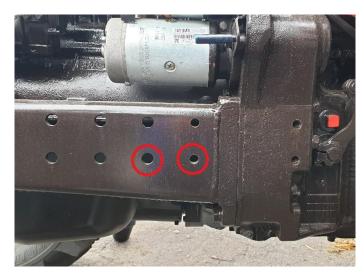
TRACTOR FRAME HOLSES FOR THE MANIFOLD BRACKET MOUNT
